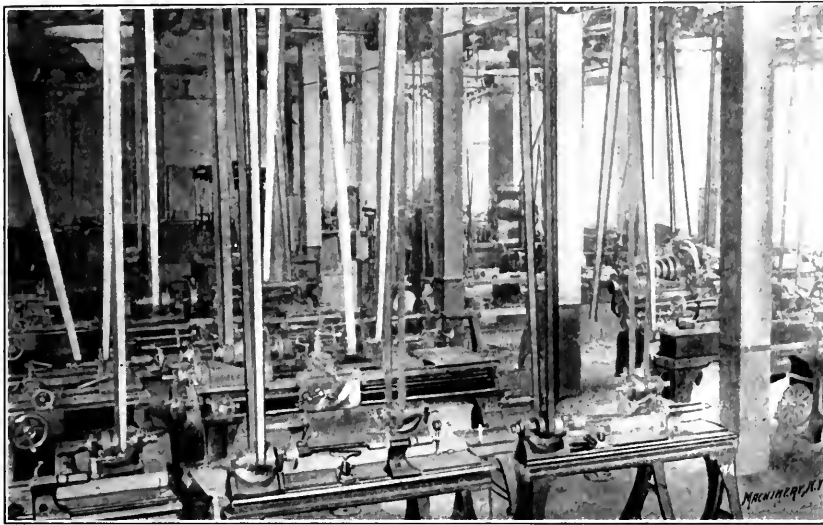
A Part of the Lathe and Planer Equipment of Shop No. 2.
